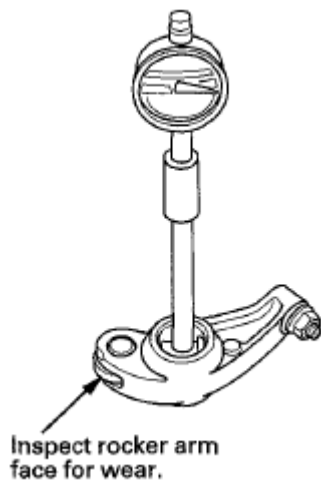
Measuring Inside Diameter Of Rocker Arm
